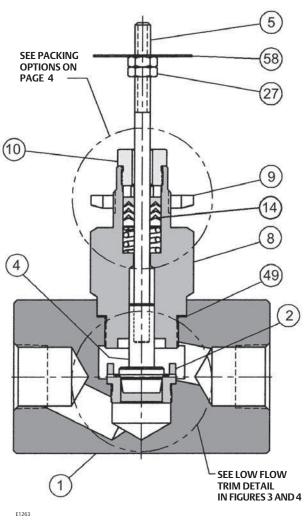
Valve Body Subassembly with Standard PTFE Spring-Loaded V-Ring Packing
